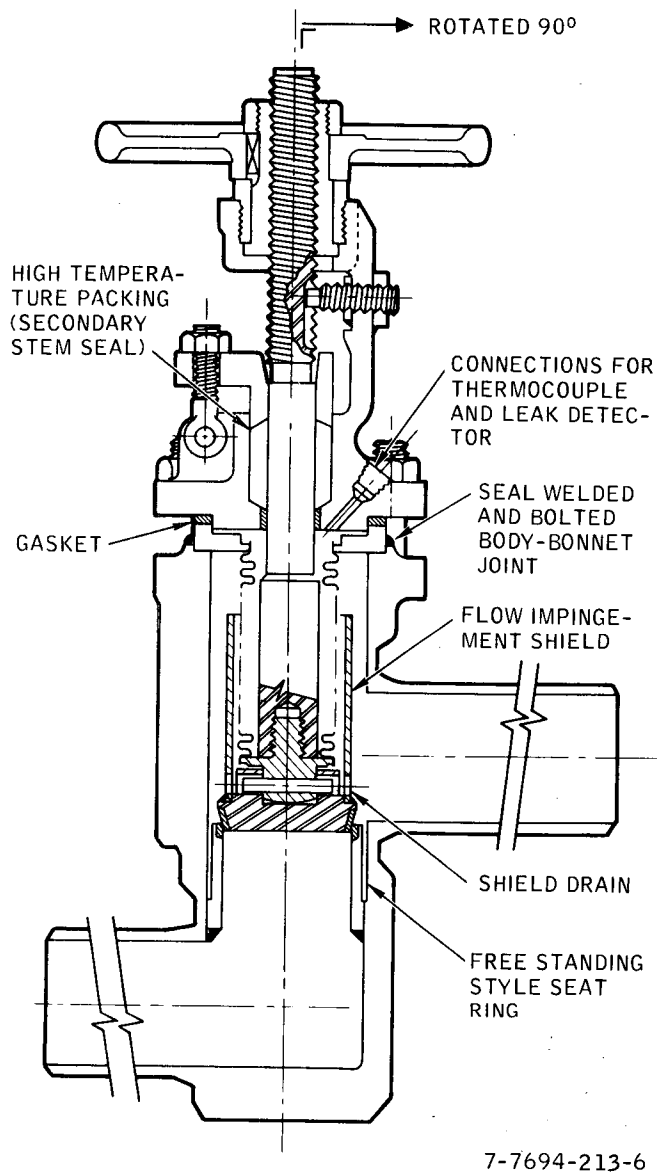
Blocking and Diverting Valve (Bellows Stem Seal)
